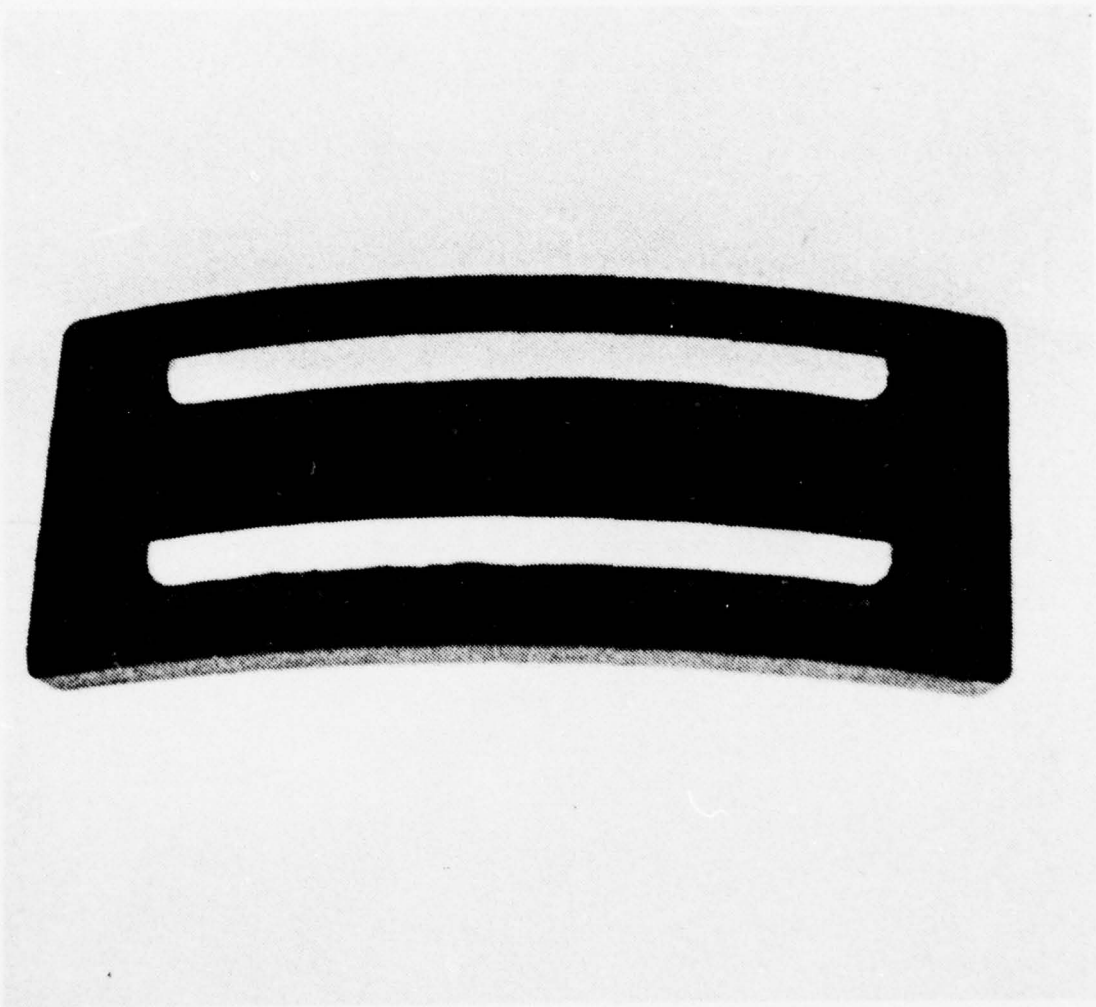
(CONTINUED) REMOVABLE PORTED INSERT
